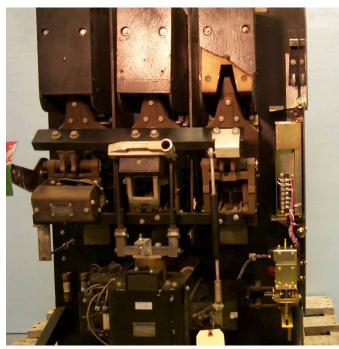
Overview: DTA / Aux. CT Module Assembly Installed in the Breaker.
